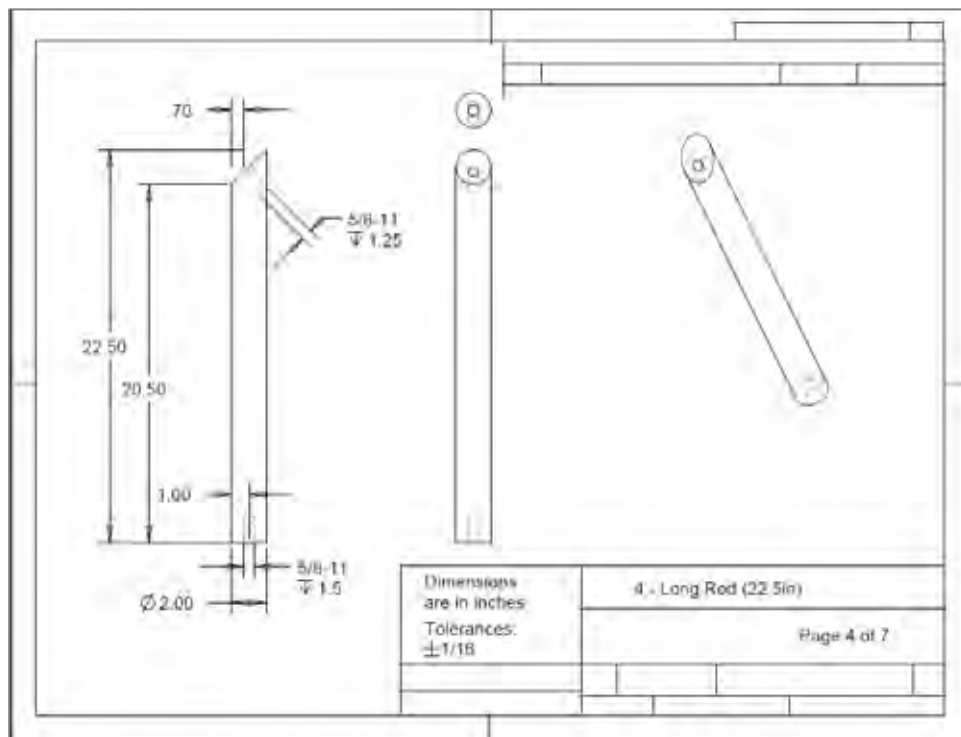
Fixture Support Long Rod for 45-Degree Angle Penetration Test Setup
